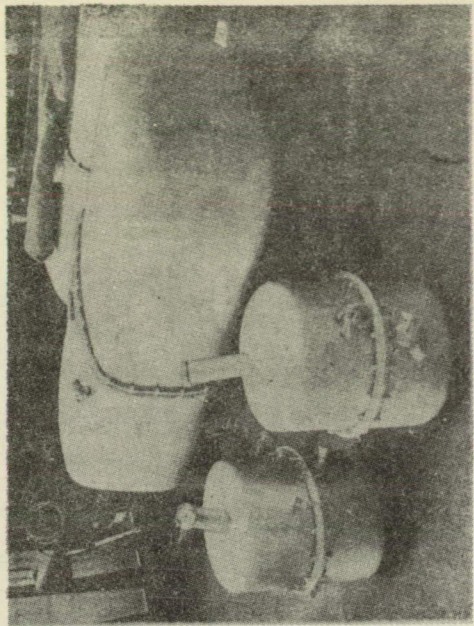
Fuel tanks built up in two identical halves, joined in the center by a flange coupling of novel design.
